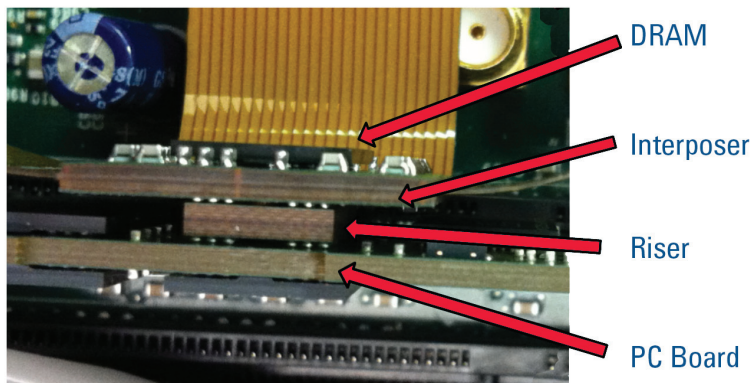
Example of stack-up using a riser and interposer. Riser provides clearance for bottom-side RC components on interposer and allows BGA interposer to clear surrounding DRAM.
